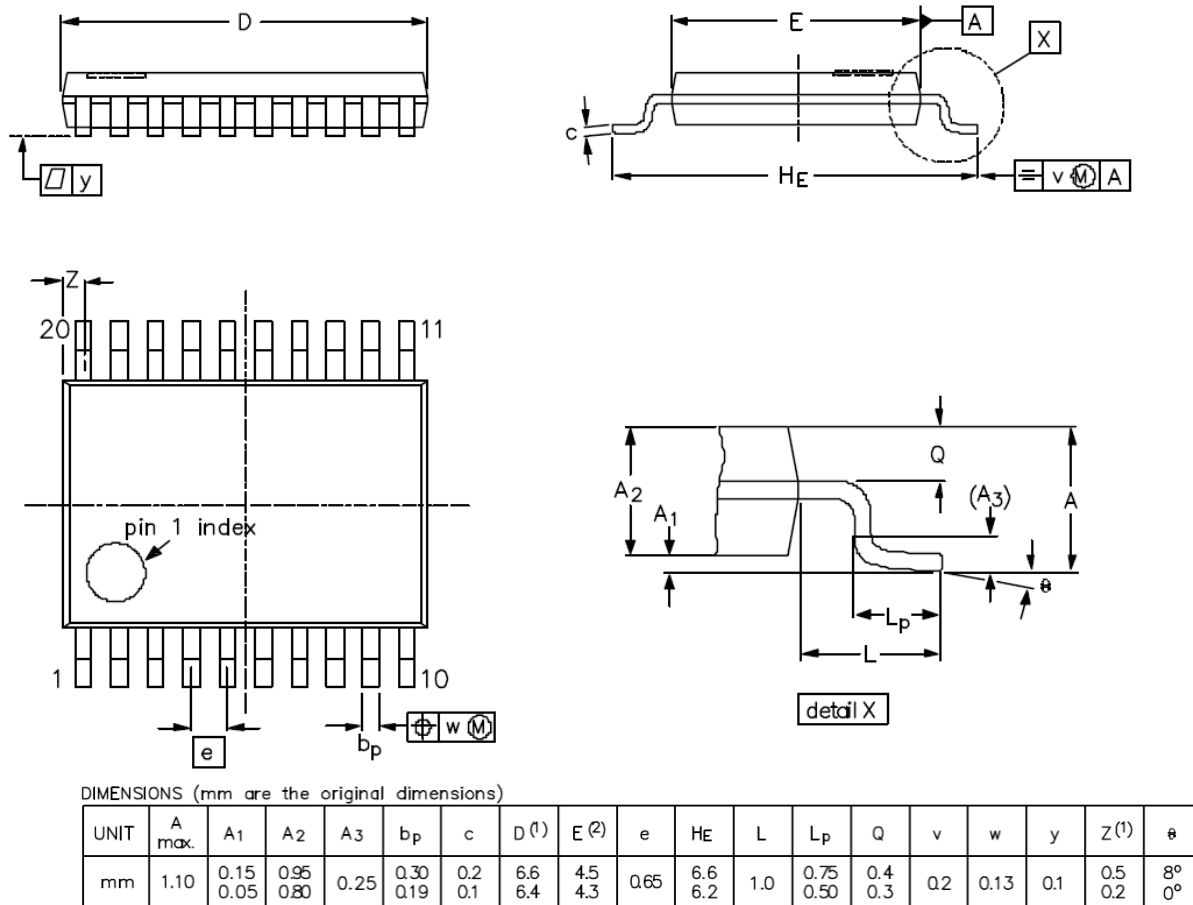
TSSOP20 Package Shape and Dimension in millimeters
